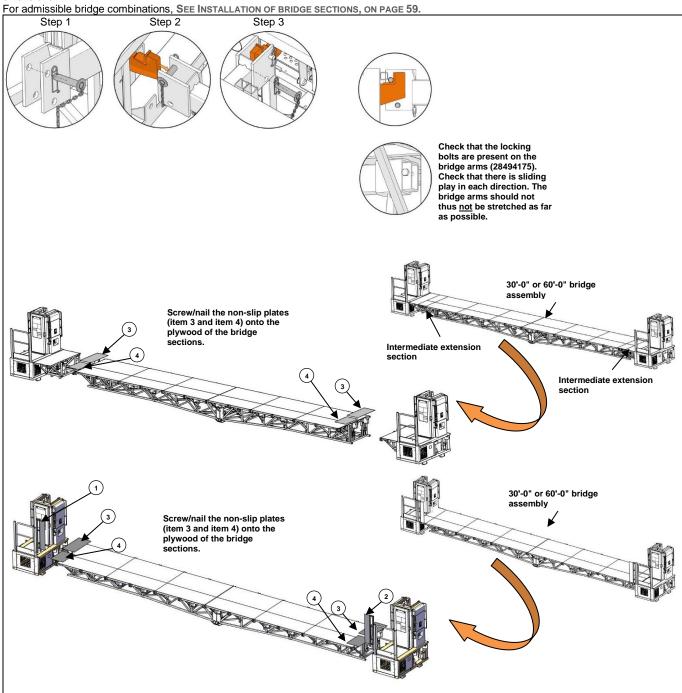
Installation of 30'-0" to 60'-0" bridge assembly on the lifting unit and/or intermediate extension
